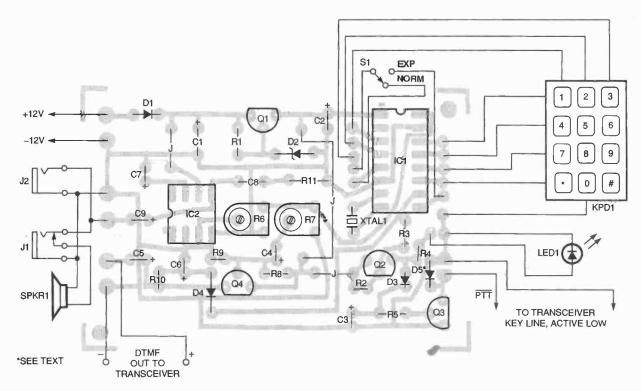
If you're using a PC board to build the Tone Pad, this parts-placement diagram should make assembly easy.
